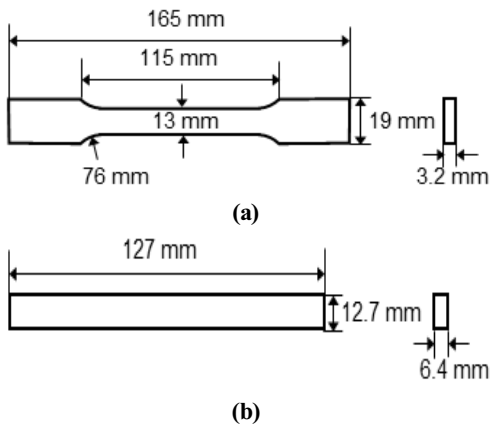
(a) Dimensions and geometry of tensile specimen (ASTM D638) and (b) bending specimen (ASTM D790)
